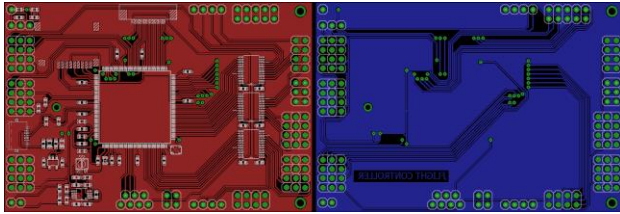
Flight Controller PCB layout, 1 layer (red) - 2 layer (blue)
